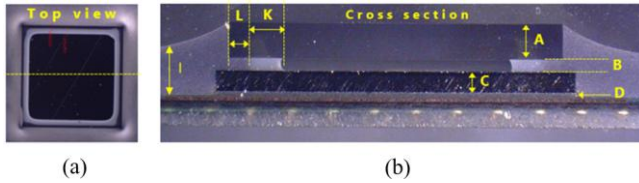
The singular image sensor package from (a) top view and (b) cross-section view
